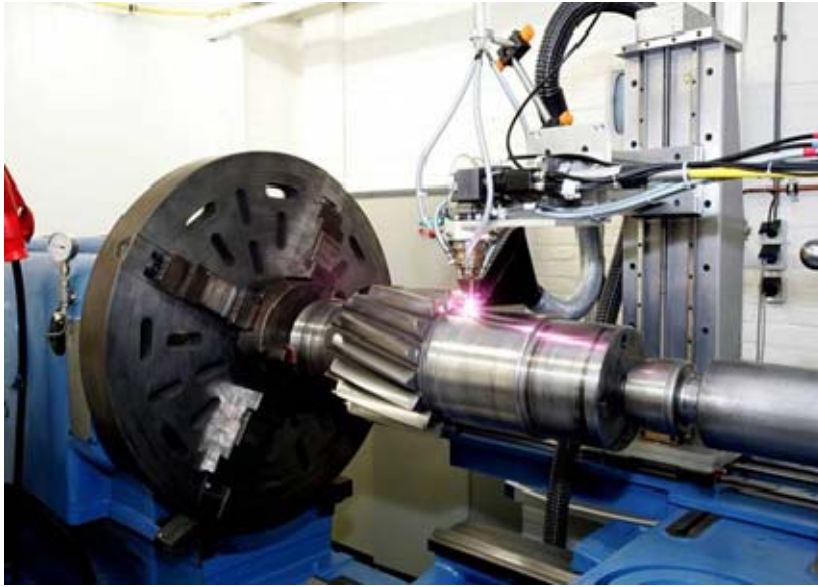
Repair of gear components with DLC (source: Stork Gears & Services) [17]
